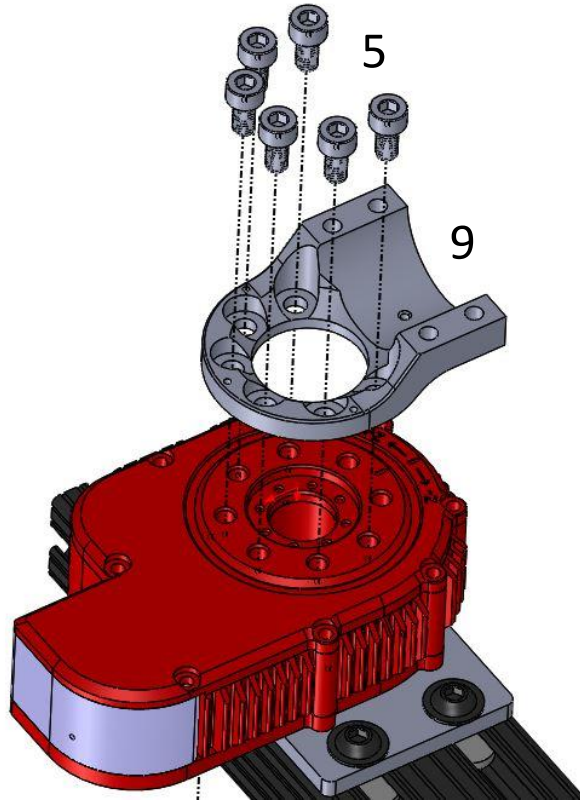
Attaching the Bottom Half of an Output Tube Adapter
